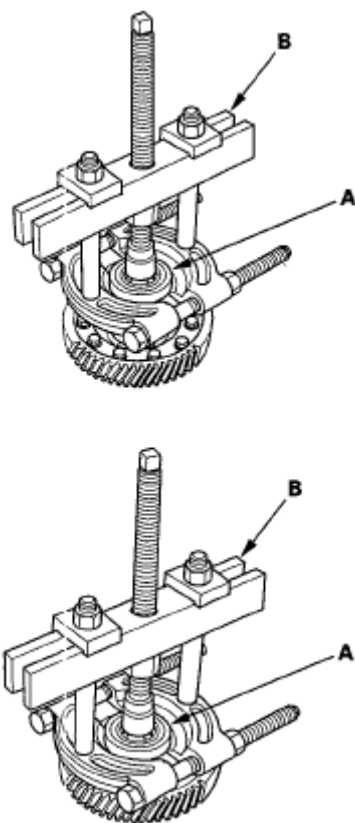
Identifying Carrier Bearings And Bearing Puller
